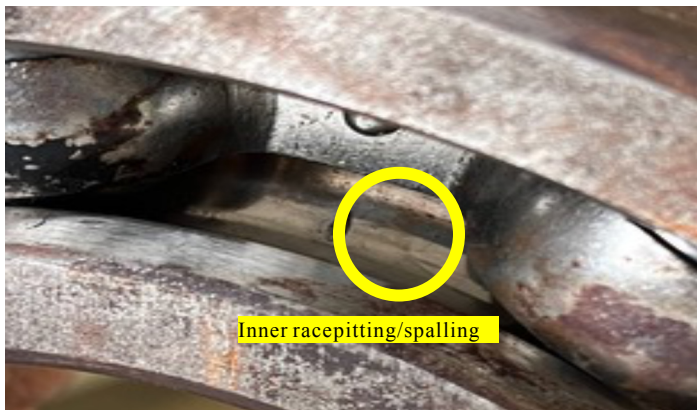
The physical condition of Pump Bearing #4 (Free End, 6321) after disassembly.
